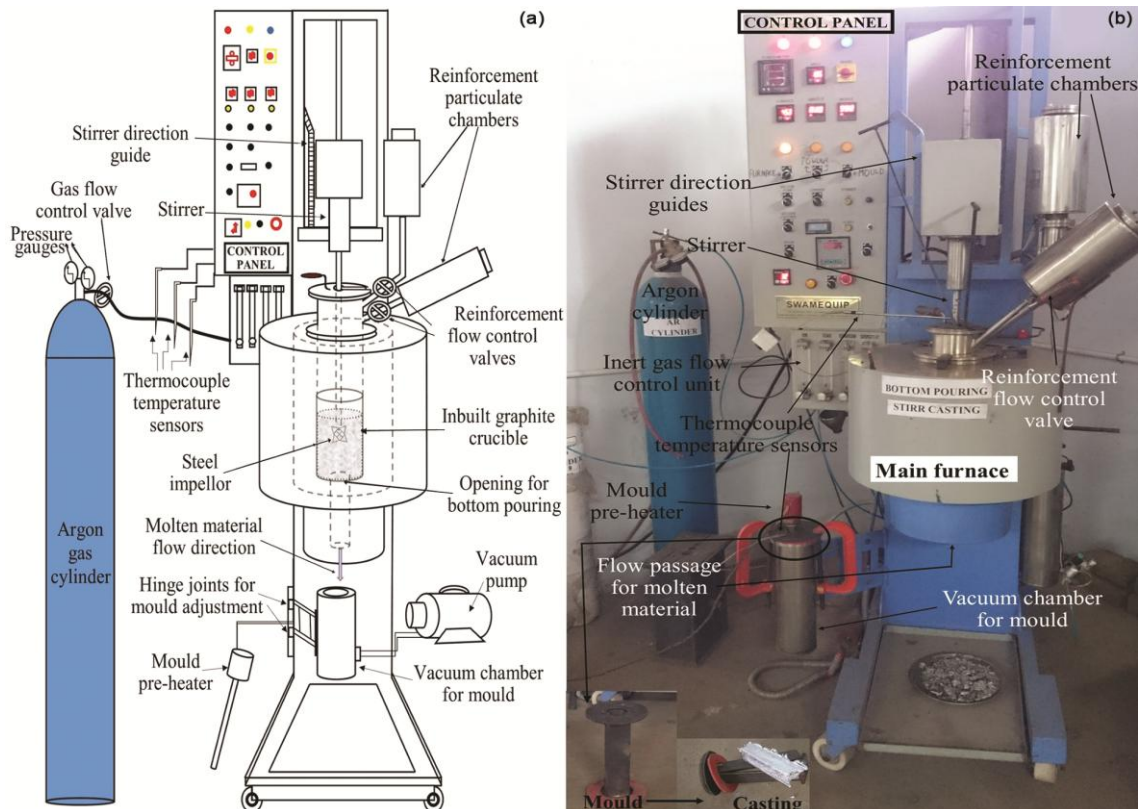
(a) Schematic of gas injection bottom pouring vacuum stir casting setup and (b) actual image of casting setup used for fabrication of Al/(Al₂O₃)-MMC inset showing the mould used for along with the fabricated casting⁴⁴.
